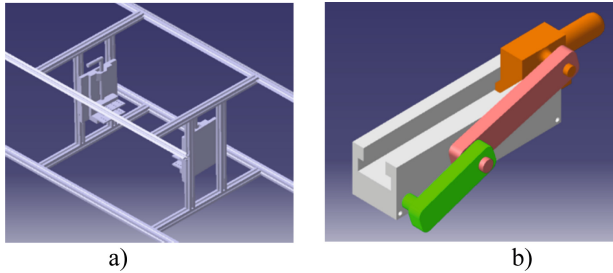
Mechanical design of the proposed testbed in Fig. 3: a) CAD design of the frame; b) CAD design of the pushing mechanism
